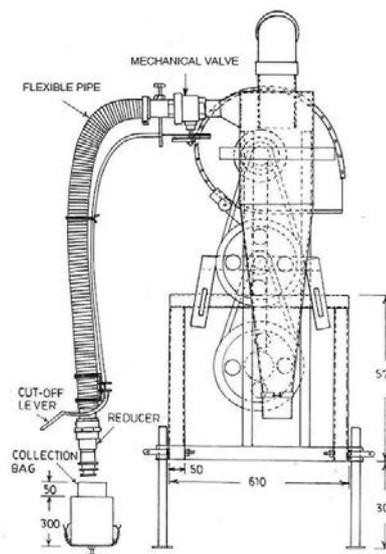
Front elevation of experimental picking aid (all dimensions are in mm)
